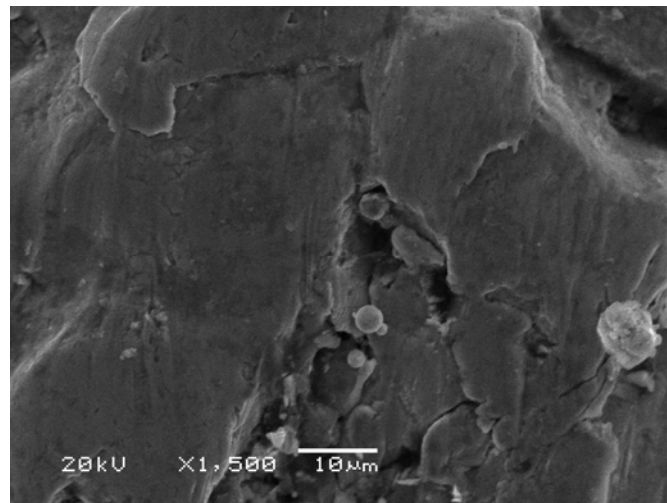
Fractography in the central region of the fracture surface showing the fracture micromechanism change. Cleavage facets and regions of shallow dimples are seen.
